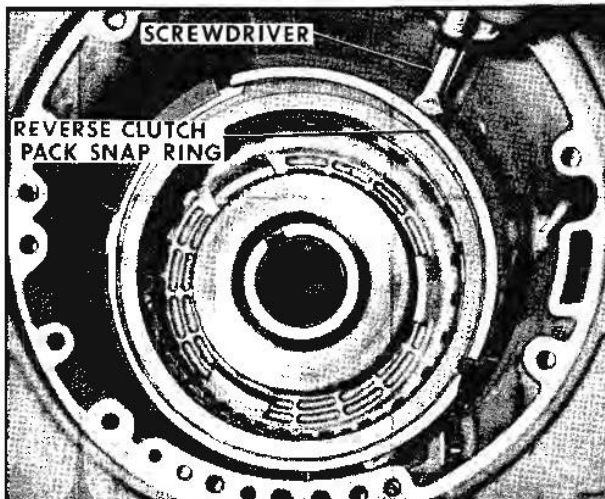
B-62 Removing Reverse Clutch Pack Snap Ring
